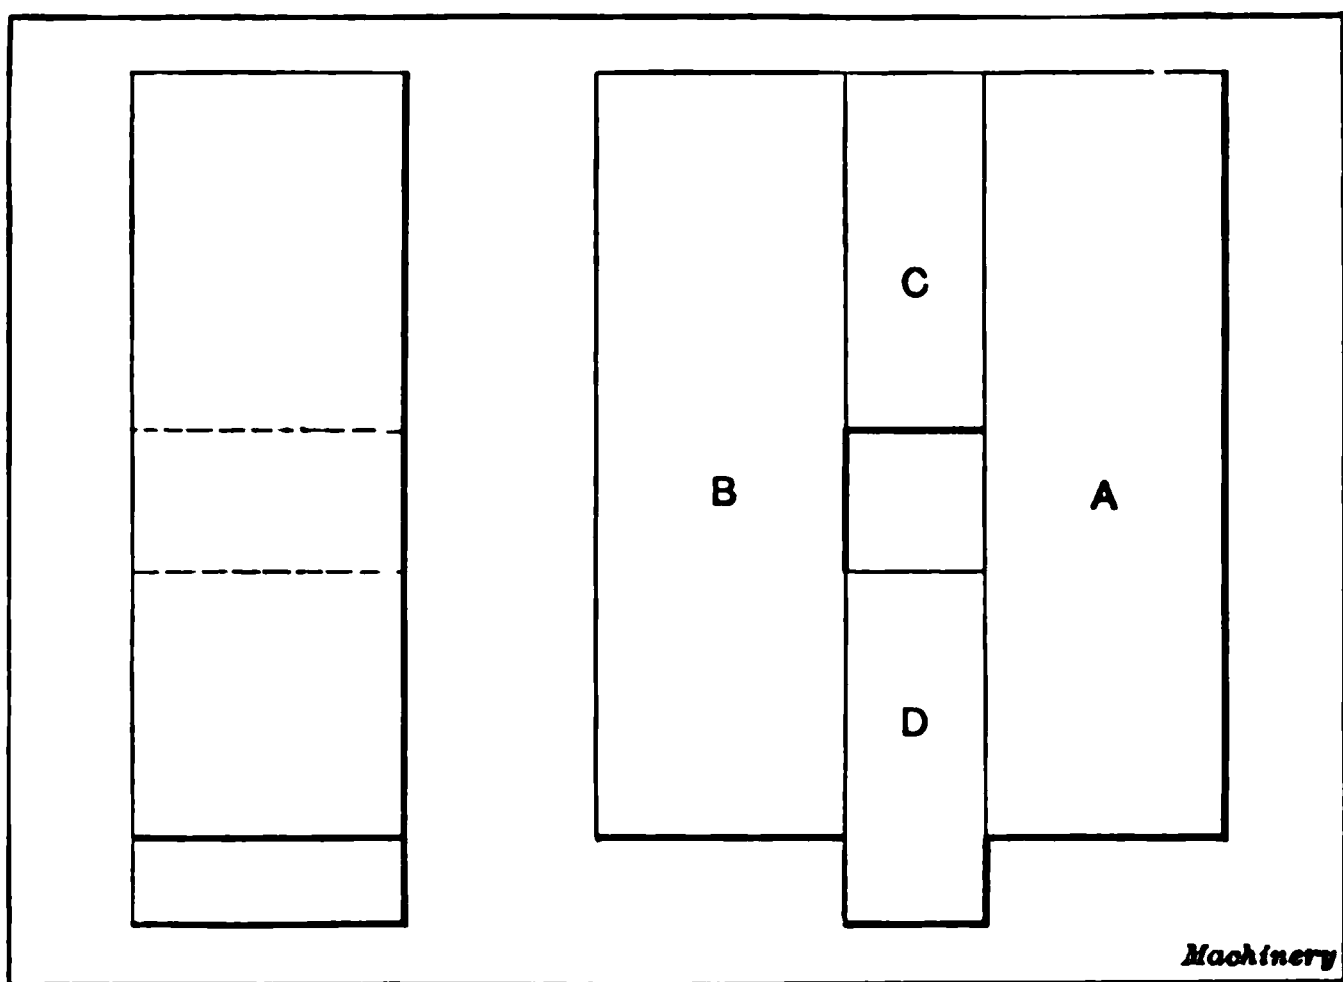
Type of Dies used in making Square Nuts in Machine of the Type shown in Fig. 32
